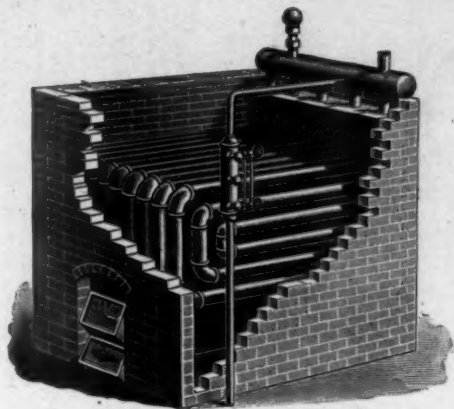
SHACKLETON'S BOILER, 1876.
